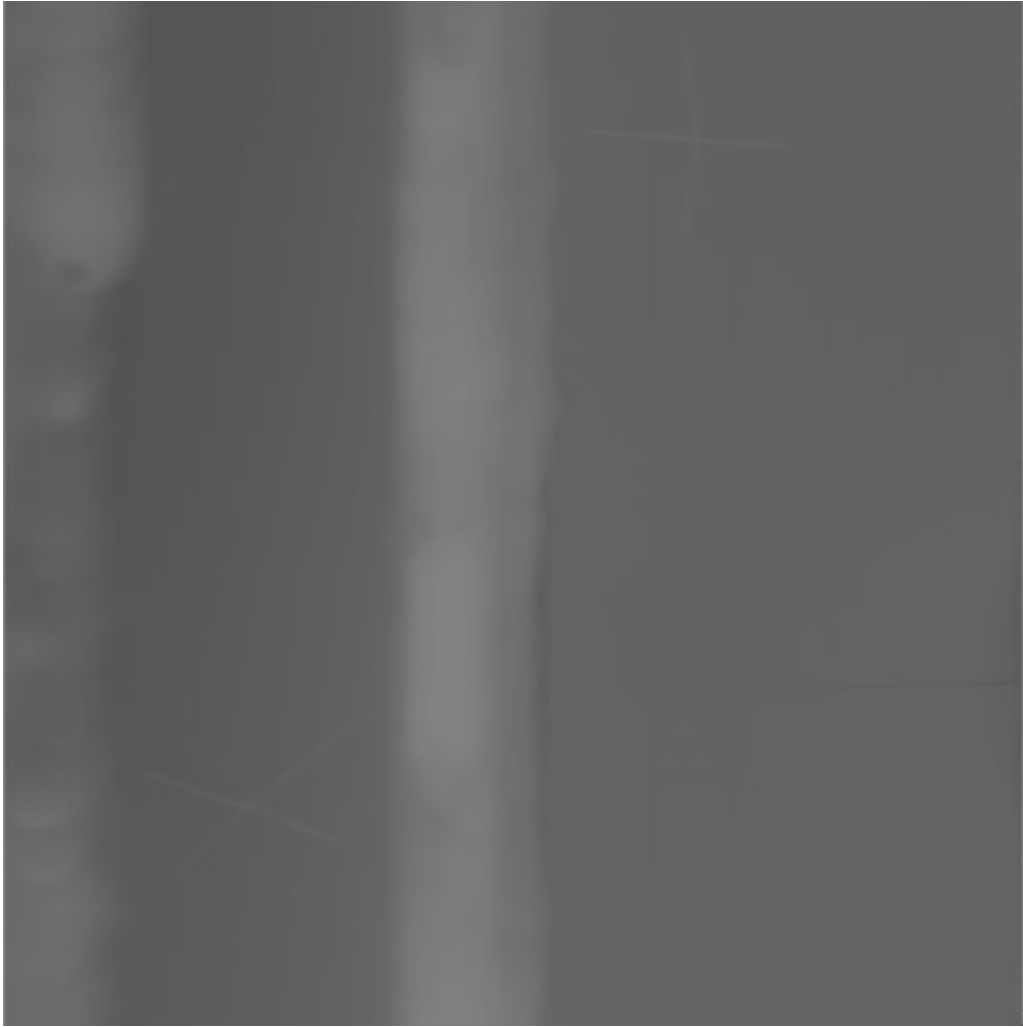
One of initial projections (“the right”) of ring welding in the pipe.
